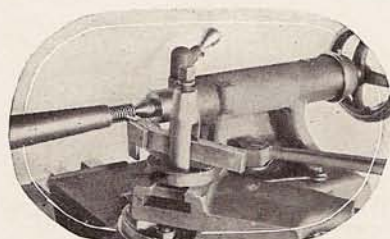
Re-chasing the Thread of an Automobile Axle Shaft.
